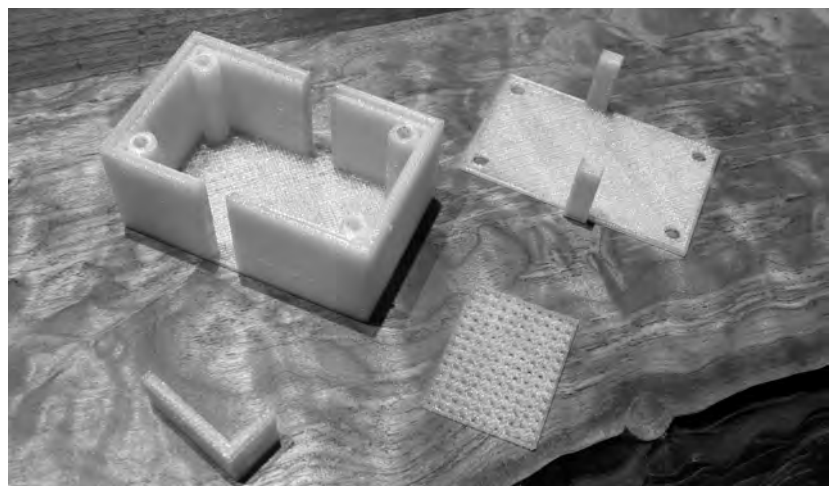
A 3D printed box, lid, an L bracket, and a perforated board.
